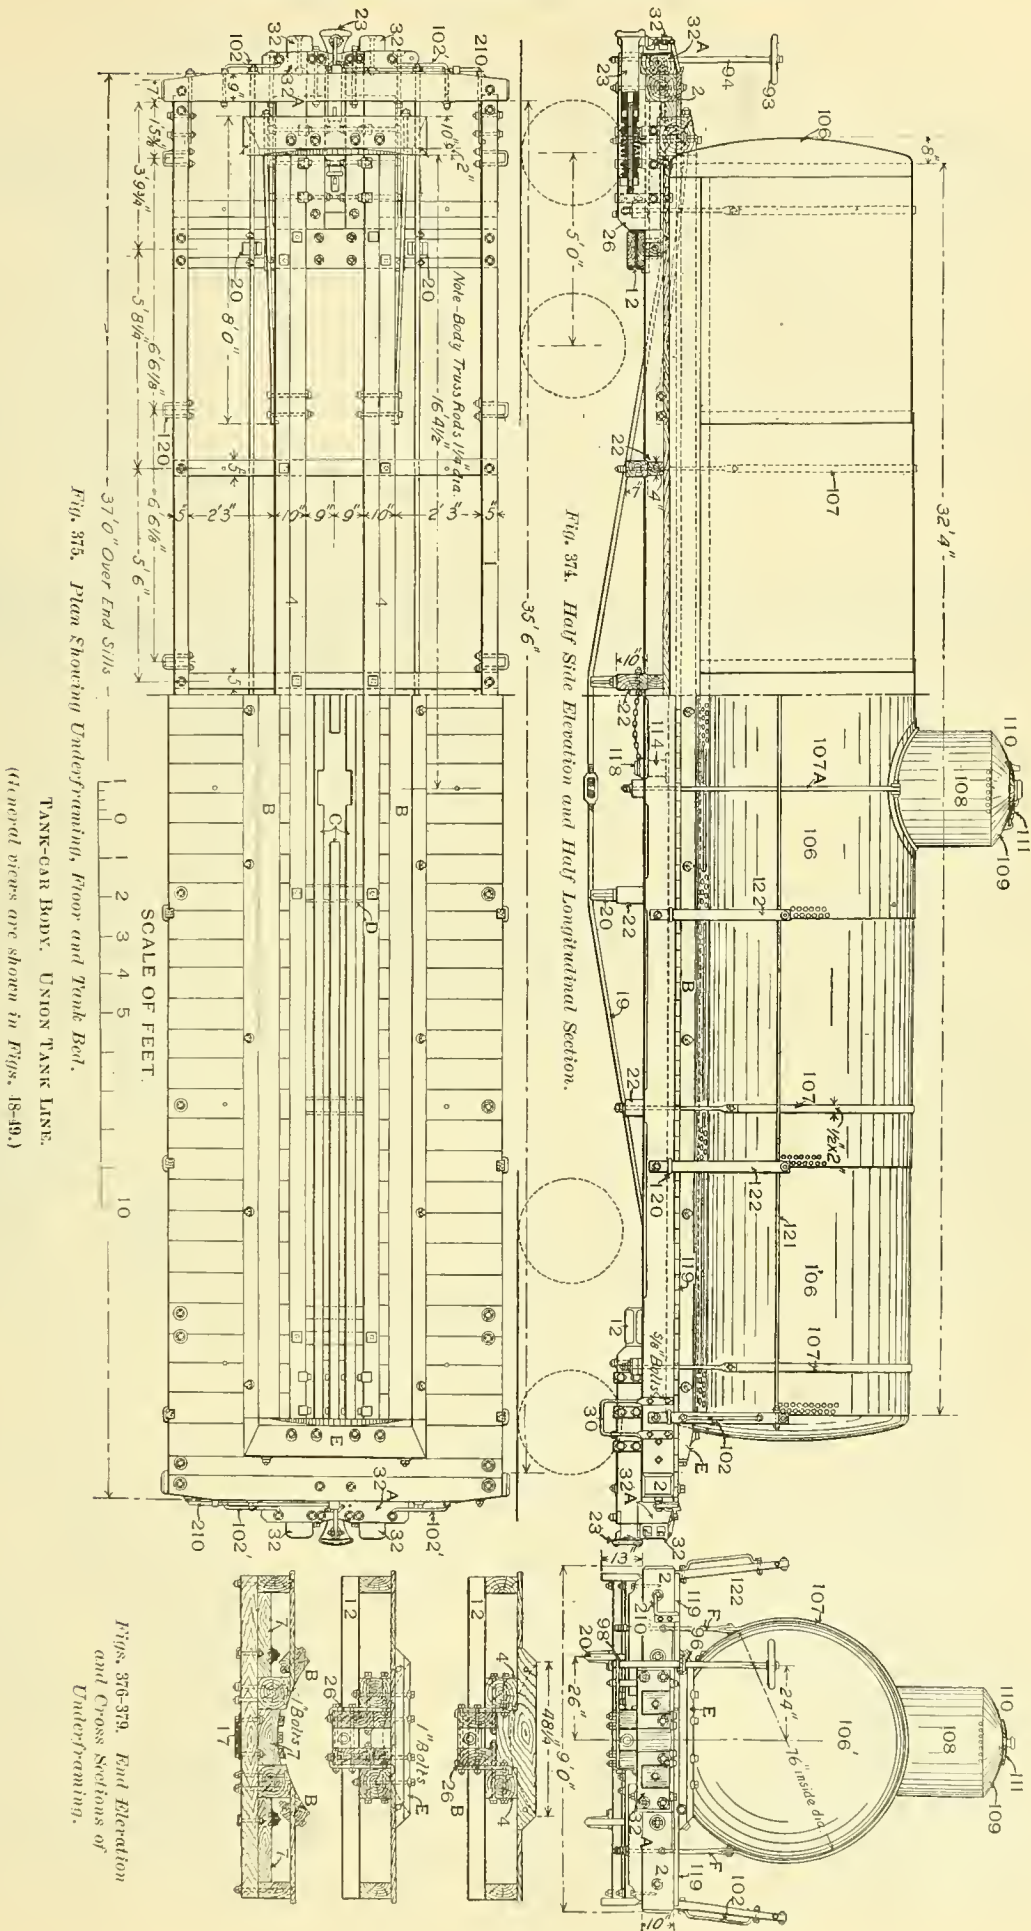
Plan Showing Underframing, Floor and Tank Bed.
